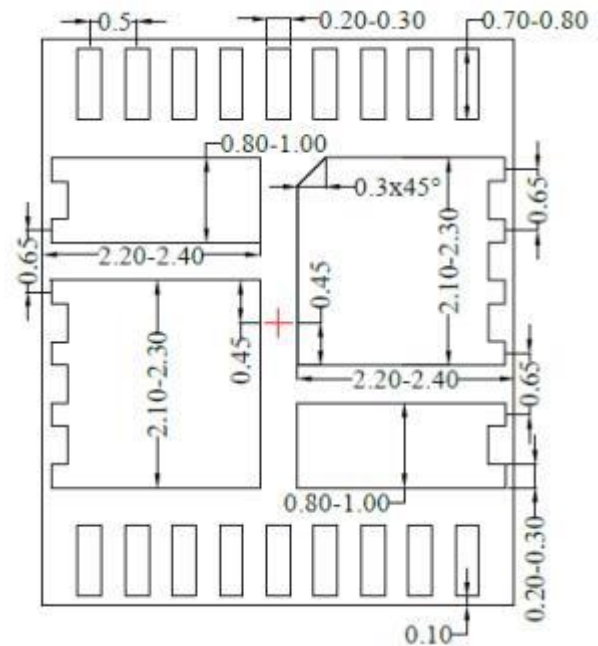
Recommended PCB Layout (Placement and Top Layer PCB)
